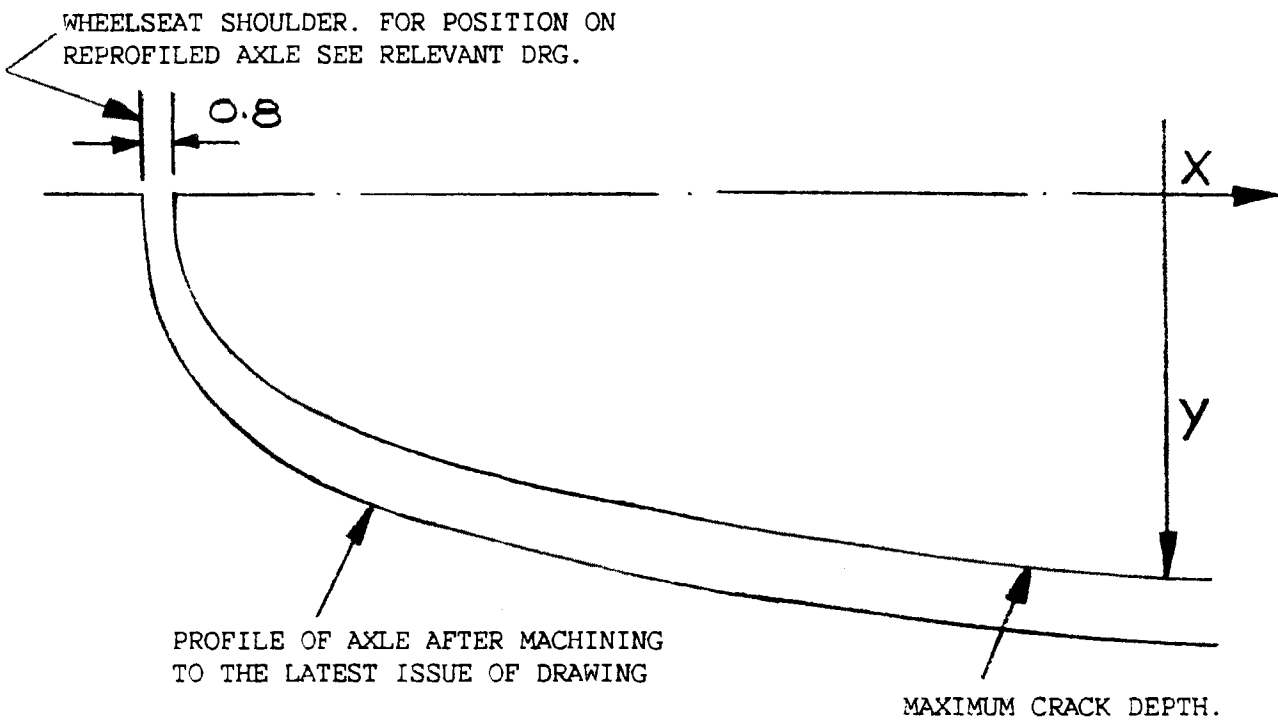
Crack Depth Removable by Modifying Axle Profile.
